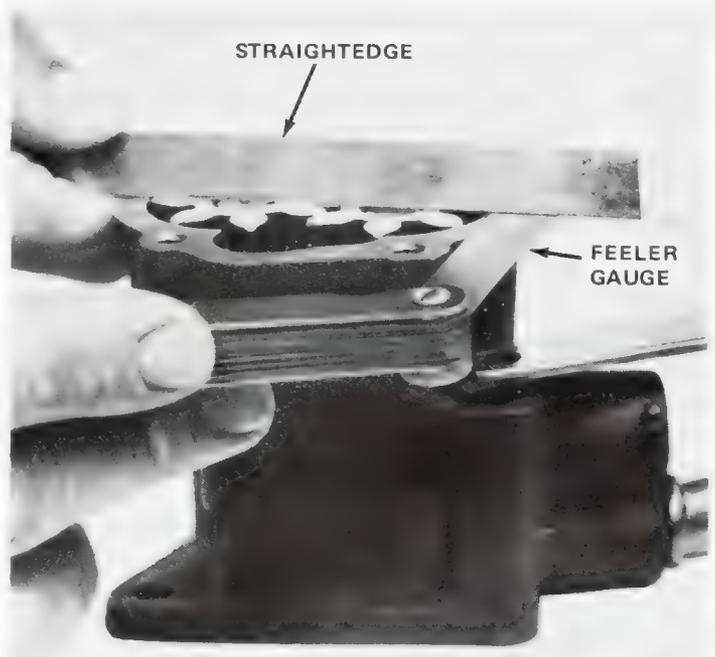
B-96 Oil Pump Gear End Clearance Measurement—Feeler Gauge Method
